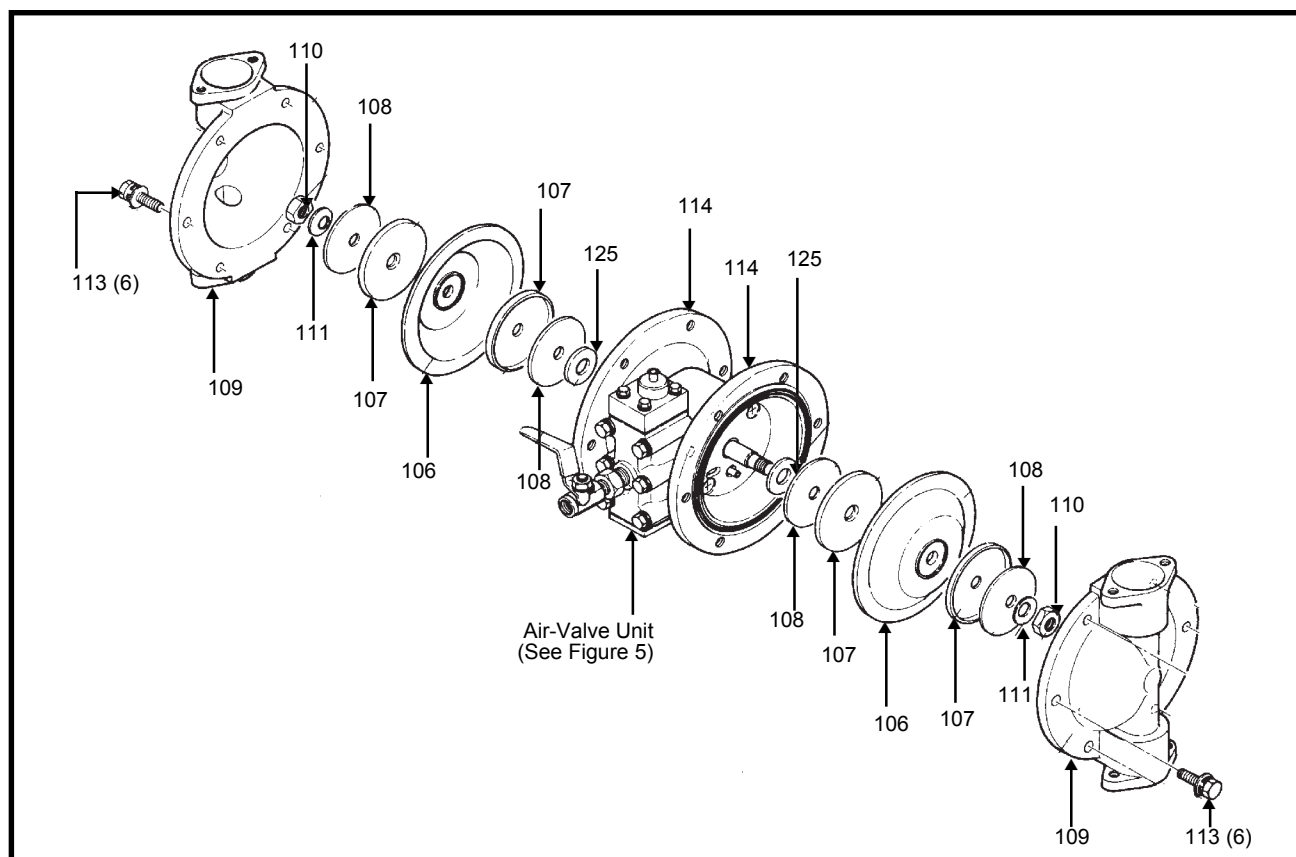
Components of Diaphragm Portion of Pump with Manifolds Removed
